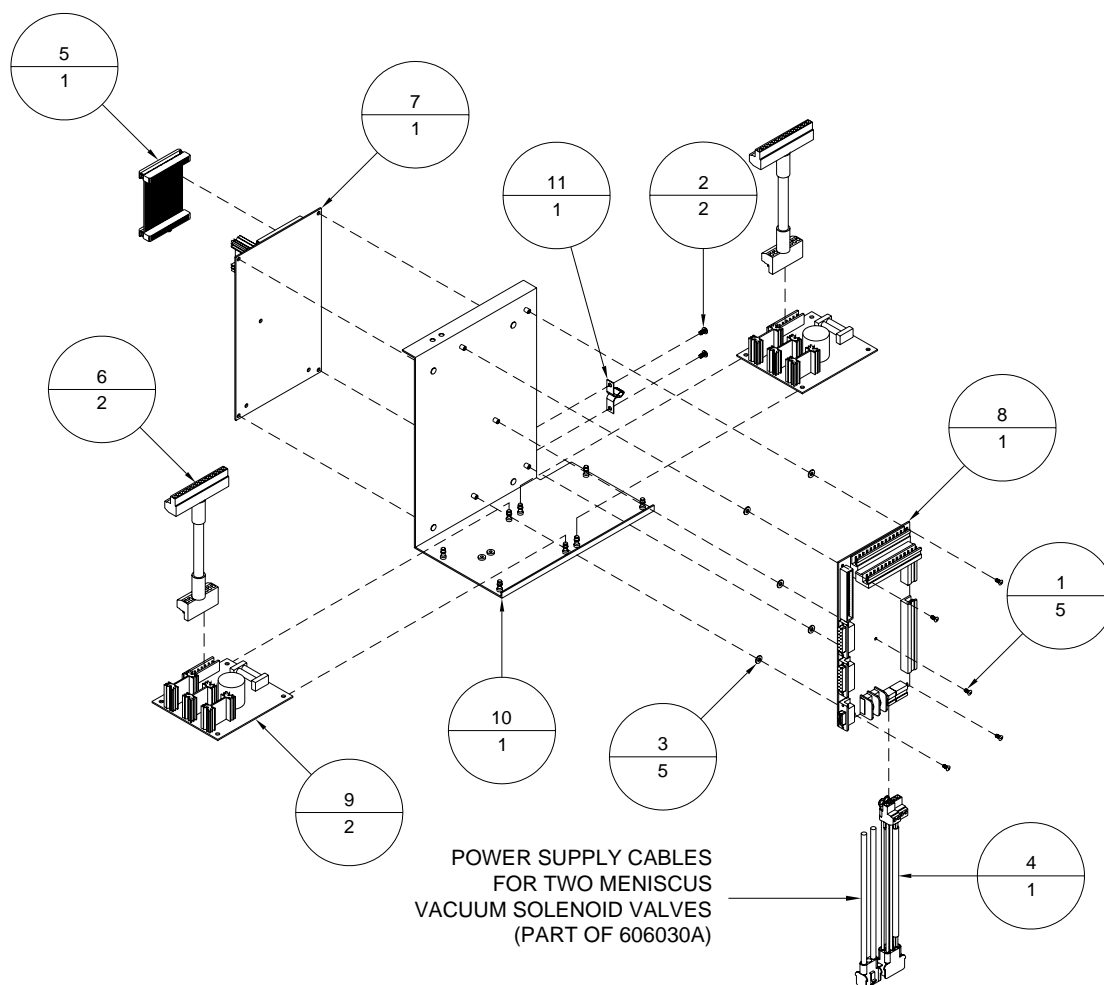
Electrical Boards Bracket Assembly (9100969A)
